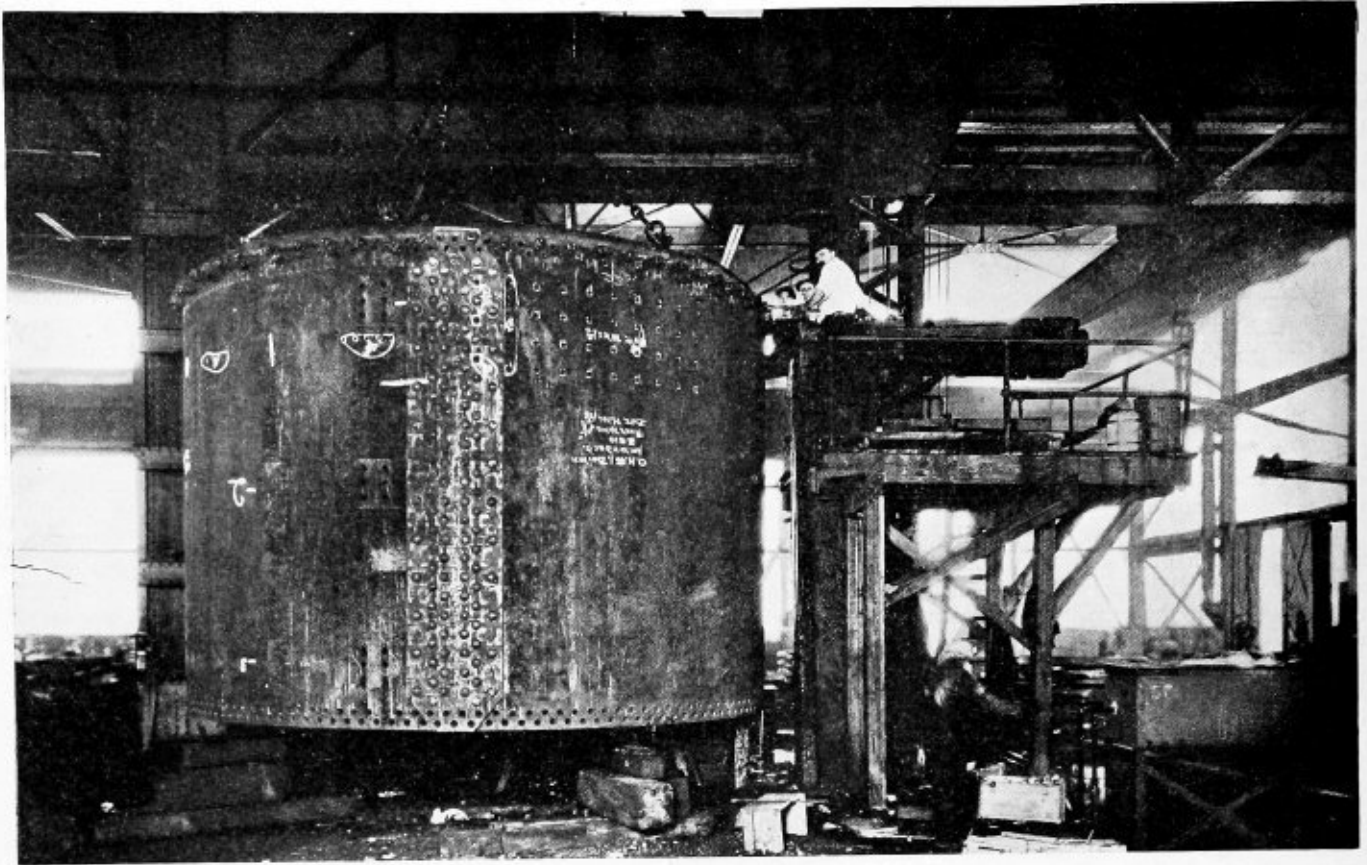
Fitting Up Head in Marine Boiler Shell
